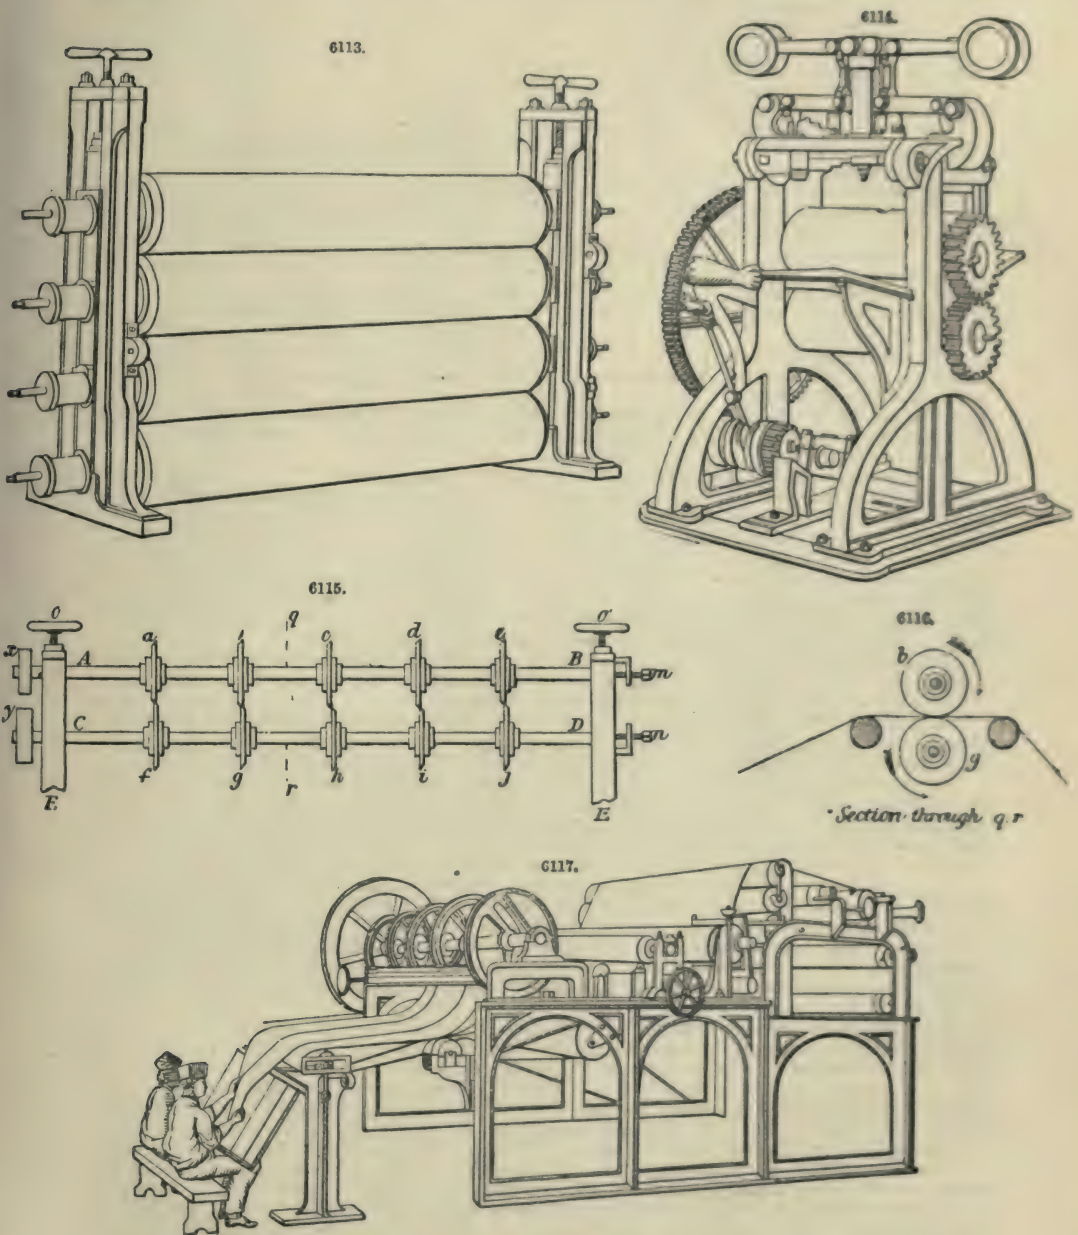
is an elevation of Tidecombe's detached paper-cutting machine. Its novel feature is the driving apparatus, consisting of short cone-drums, by which the lengths of the sheets of paper are regulated. By turning a hand-wheel one of the driving pulleys is expanded and the other contracted at the same time, thus giving double the range of speeds to the paper than by merely altering the diameter of one pulley. These alterations are made by the united movement of a right-hand thread on the shaft of one pulley, and a left on the other, in connection with cones that move into and expand the segments of one and retire from and contract those of the other. By thus altering the diameter of each simultaneously, a saving of time as well as paper is effected, and a less number of the ordinary change-wheels is required. They are driven by an *endless belt*, which works evenly.
